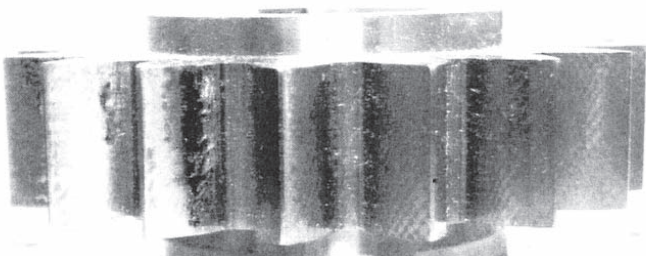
The pinion after the test No. 2. There is no apparent wear and the hone marks are still clearly visible on the tooth surfaces that were in contact during the standard FZG test (right hand side of the picture). However, after the 30-hour test (left hand side) there was destructive pitting and spalling on most dedendum surfaces, some across the whole width, some confined to one half (possibly a slight misalignment but if so it did not affect the samples 1 and 4). The colour of the pinion was very light brown, slightly darker at tips, while the matching gear retained its silvery appearance and the wear marks were acceptable, with only a limited evidence of metal transfer to the gear.
